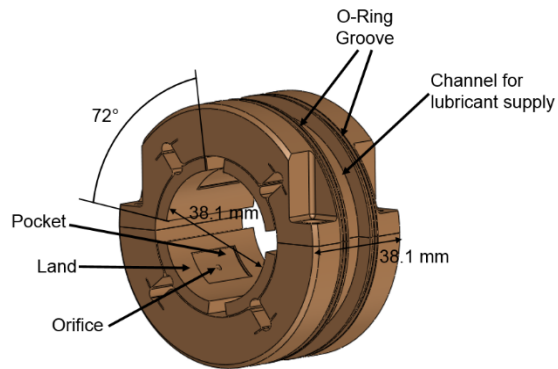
Schematic view of the flexure pivot, tilting pad hydrostatic journal bearing. [3]
